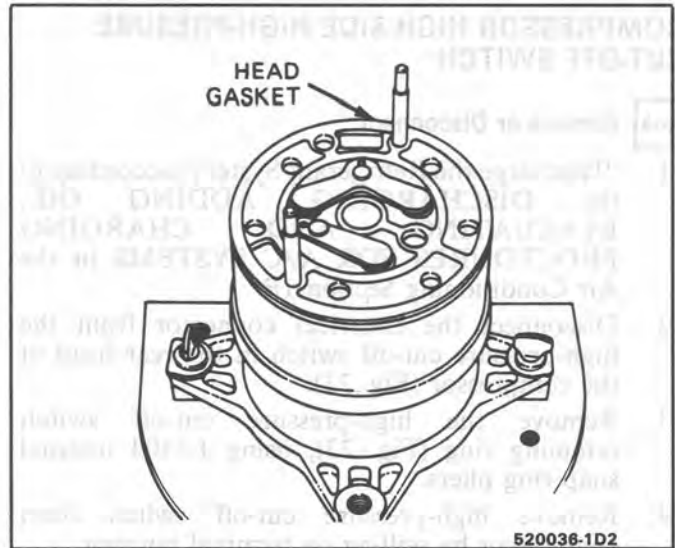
Head Gasket Assembled Over Rear Valve Plate
